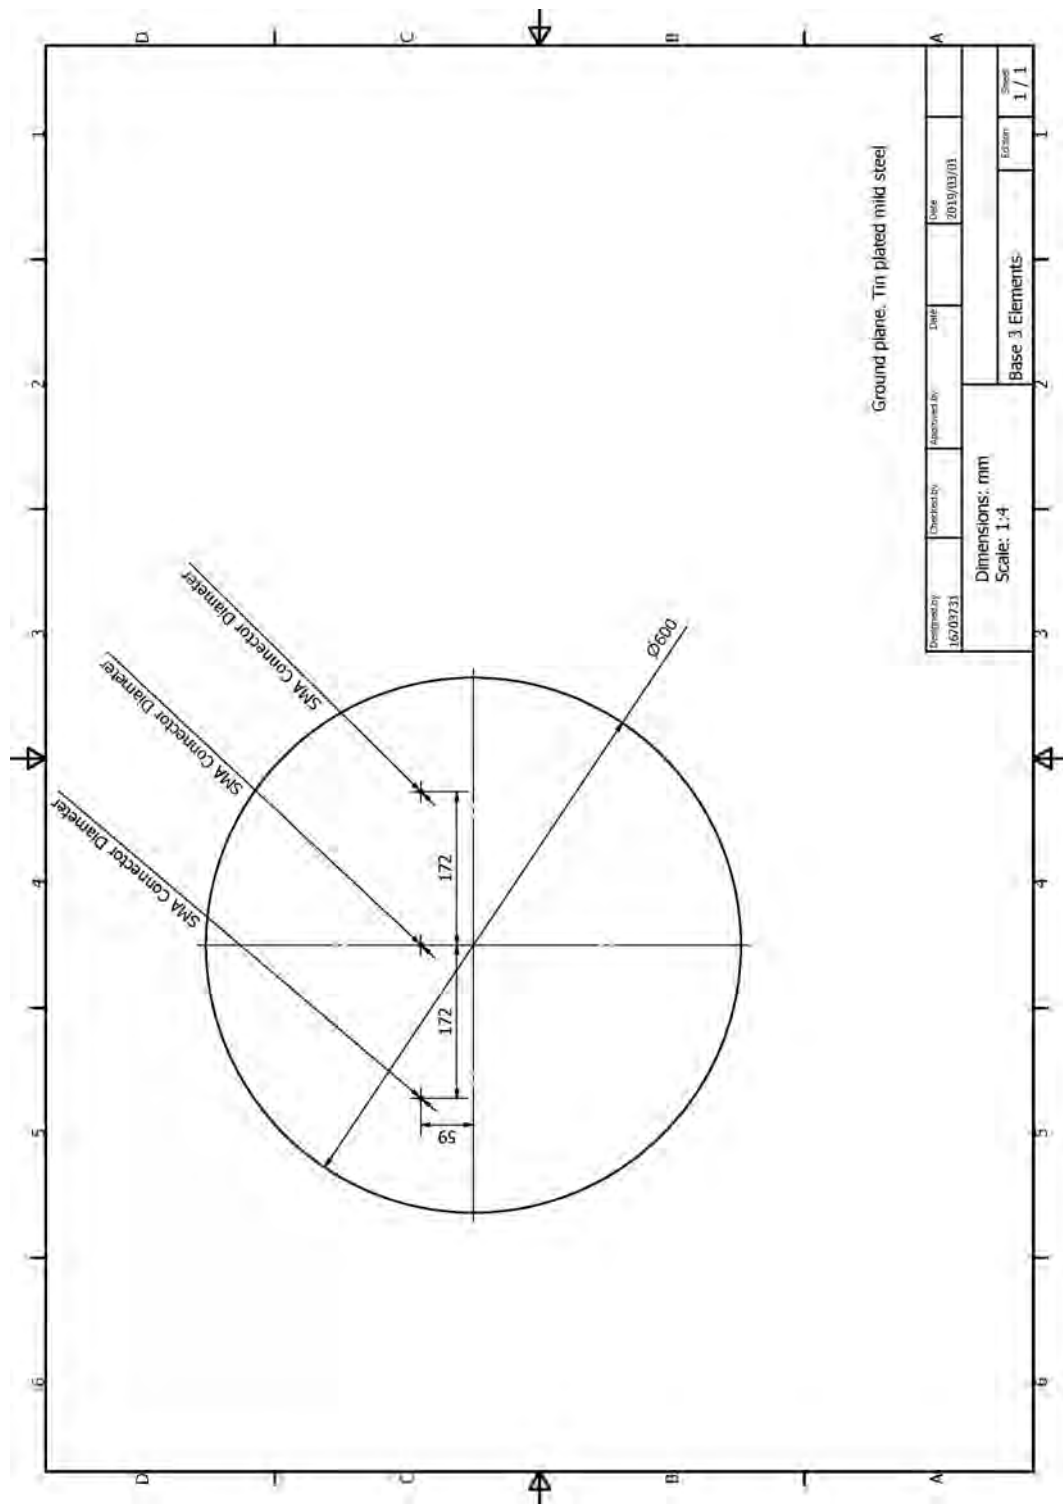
1:100 scale three element model tin plated mild steel base plate engineering drawing. This engineering drawing shows the base plate used for the 1:100 scale three element model.
